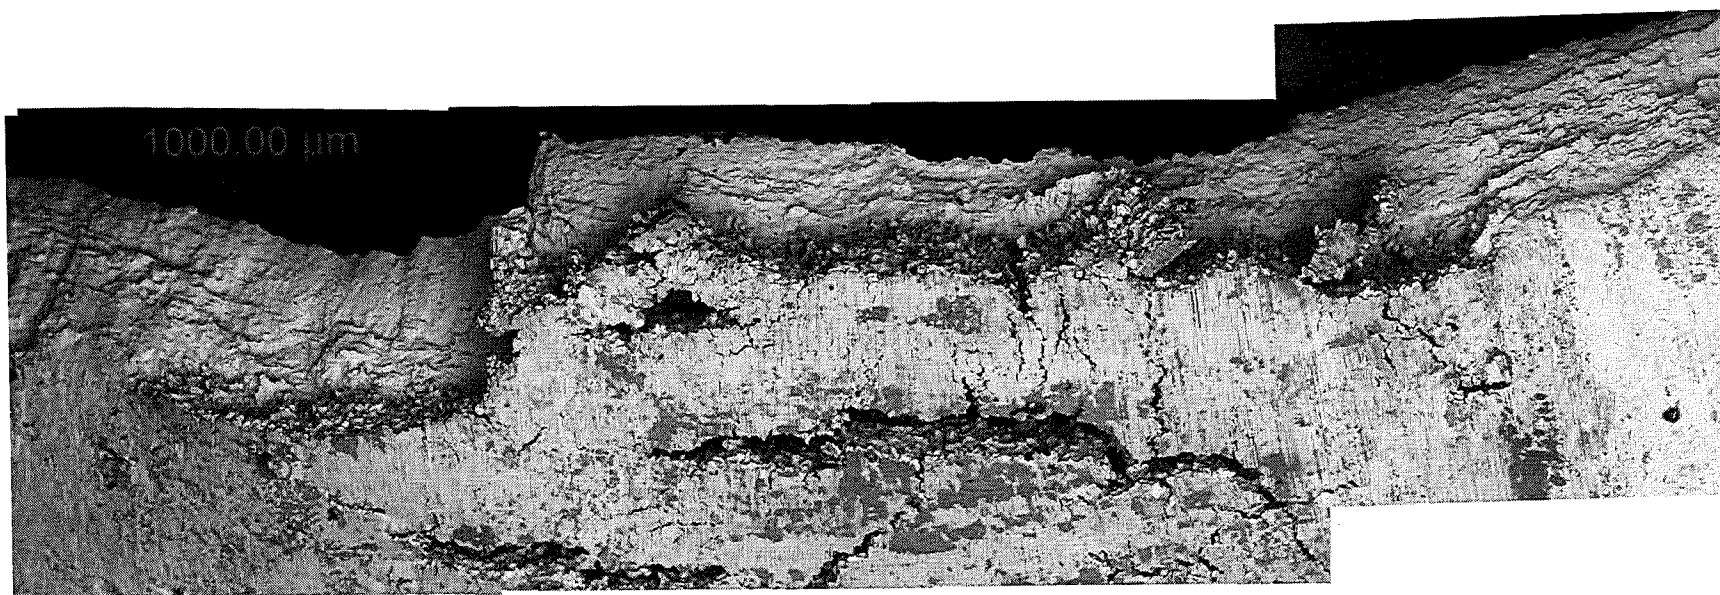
OD Surface of R19C38 02H, Adjacent to Burst Opening (Axial Direction is Horizontal)
